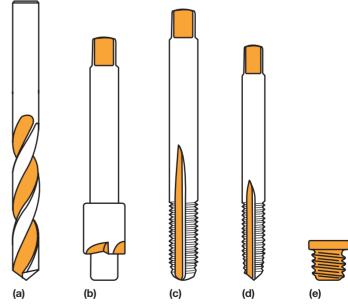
A Timesert[®] kit includes the drill (a), the recess cutter (b), a special tap (c), the installer (d), and the Timesert[®] threaded bushing (e).
